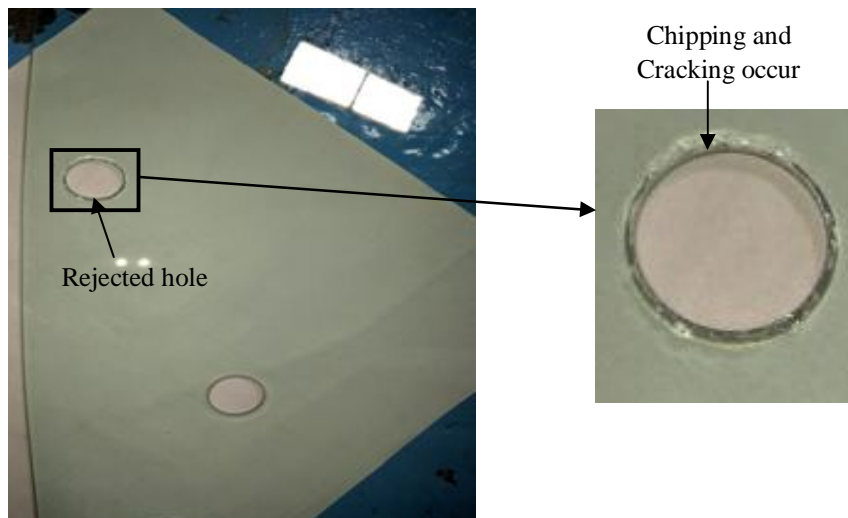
Float glass workpiece by water jet machining (WJM)
